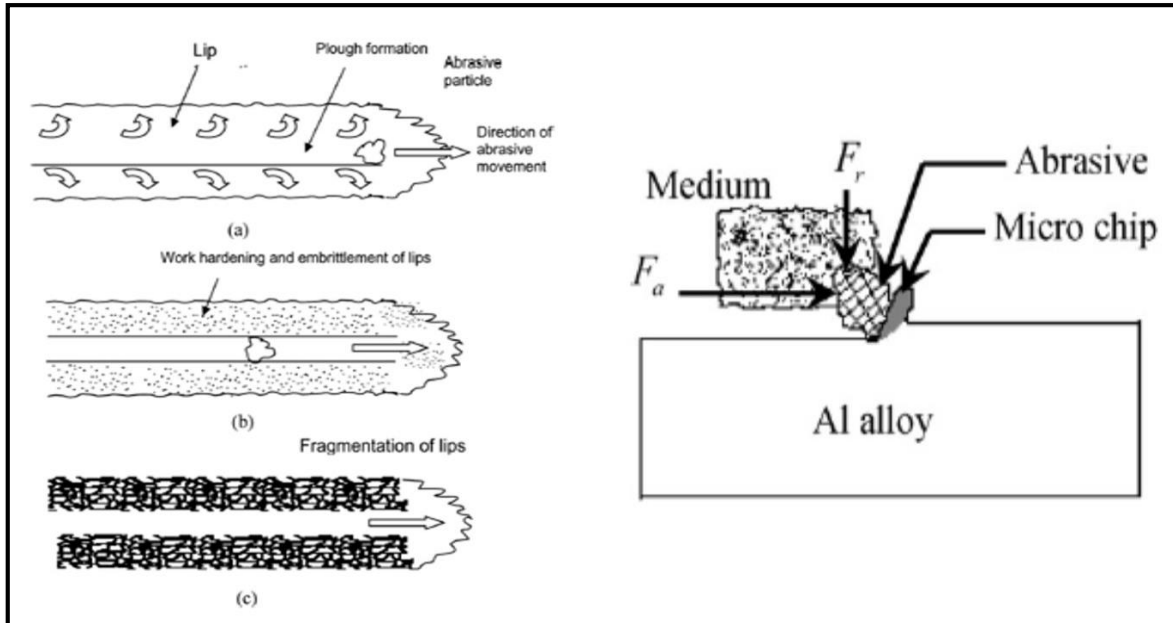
Schematic representation of mechanism of machining in AFM [23, 38]
